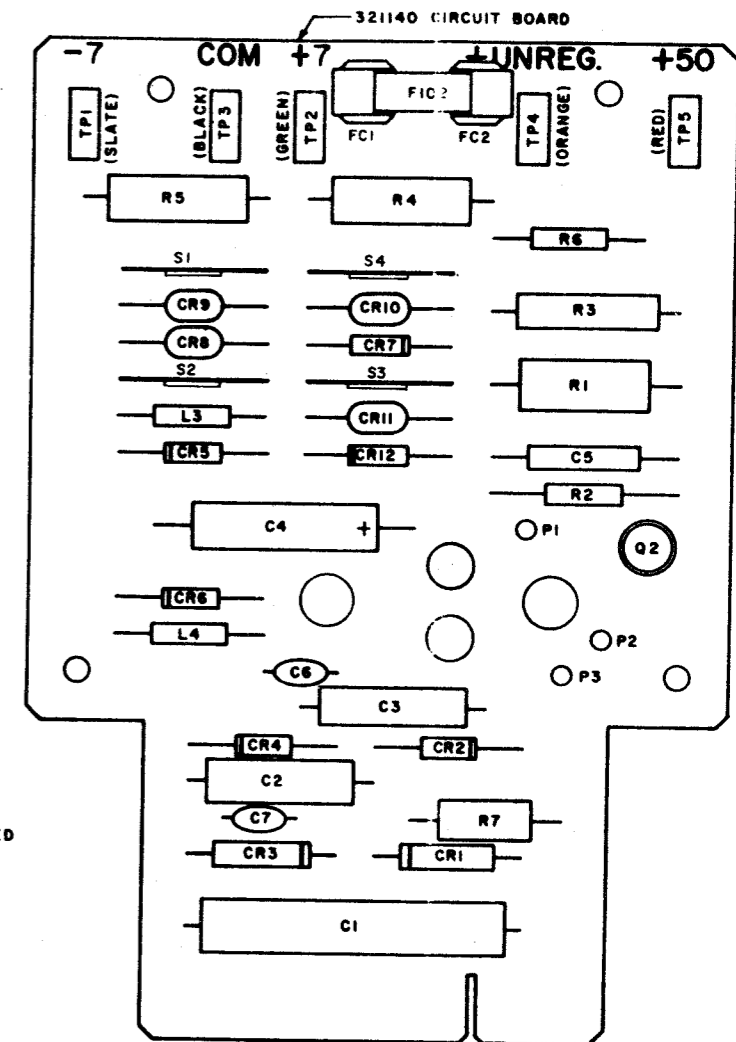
321290 Circuit Board Assembly w/Heat Sink (Sheet 1 of 2)
